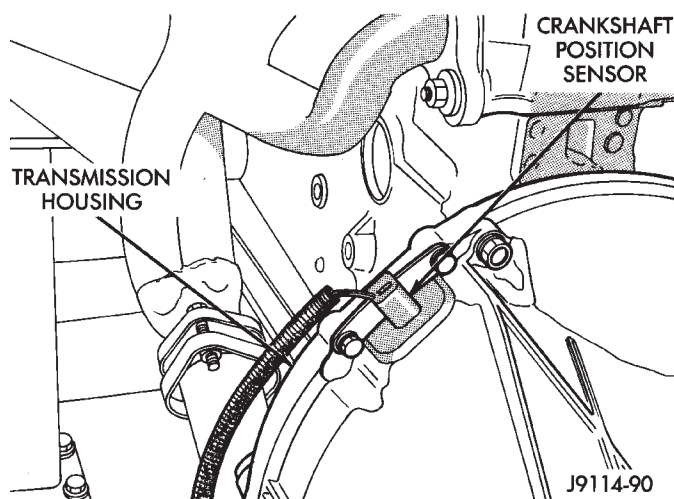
Crankshaft Position Sensor—4.0L 6-Cyl. Engine—All Except YJ models With Auto. Trans.
